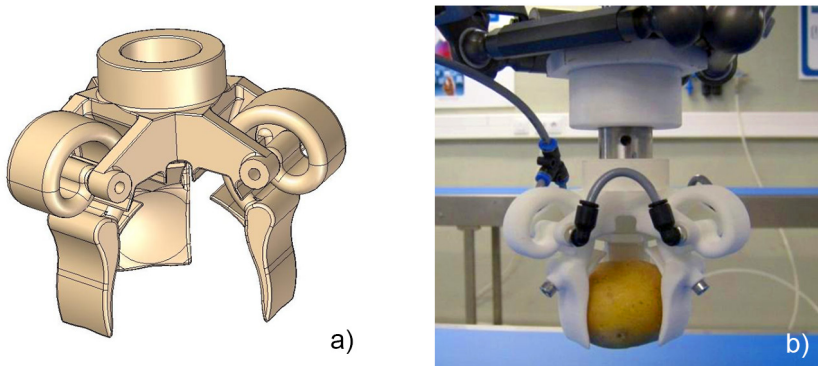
An example of a mono-material pneumatic gripper, utilizing a spiral-shaped air chamber and rotational links. a) CAD-model of the pneumatic gripper. b) The 3D printed prototype [48].
